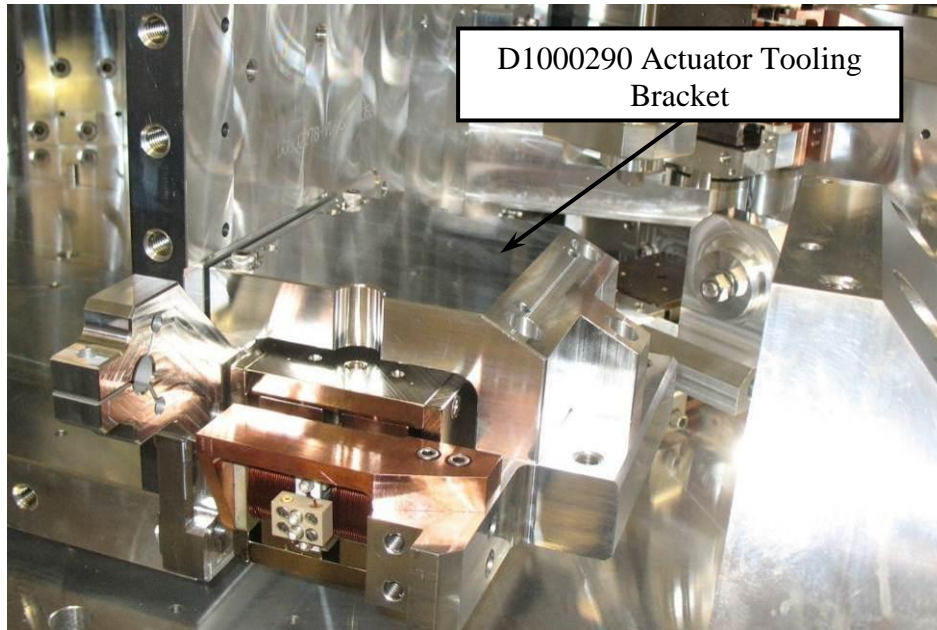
D0901102 Stage 0-1 Horizontal Actuator Assembly (with D1000290 Actuator Tooling Bracket) on the ISI
